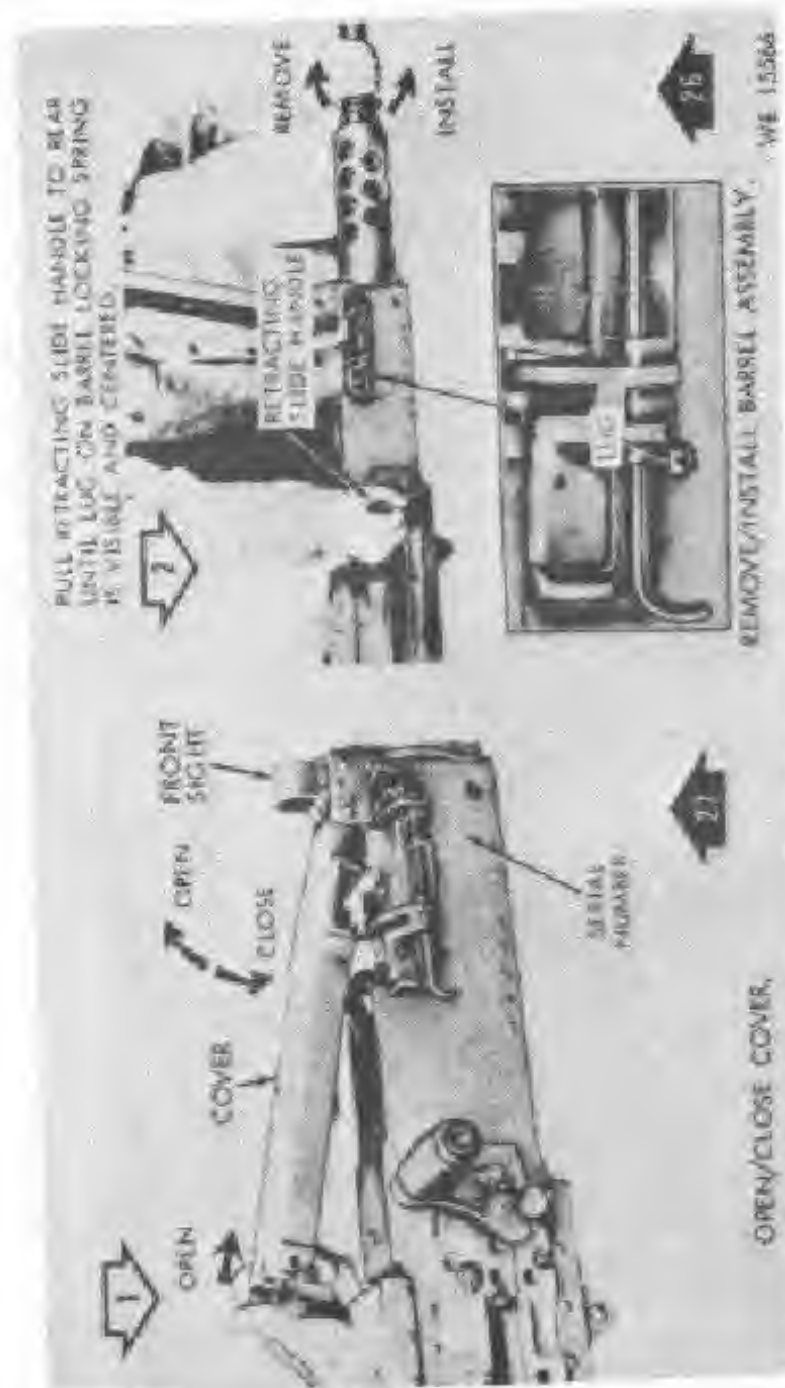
Disassembly/assembly of Caliber .50 Machine Gun, M2. (1 of 20)
